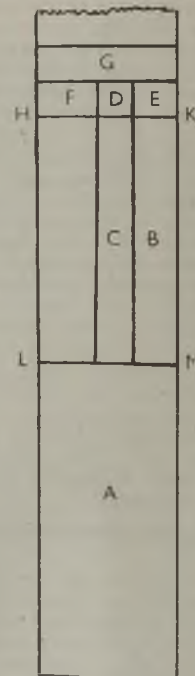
(RIGHT).—METHOD OF SECTIONING STRIP INGOTS. KEY: A = SPECIMEN FOR ROLLING TEST; B & C = TENSILE SPECIMENS; D-F = MICROSPECIMENS; G = SAMPLE FOR ANALYSIS; HK AND LM = NICKED AND FRACTURED FOR VISUAL EXAMINATION.
